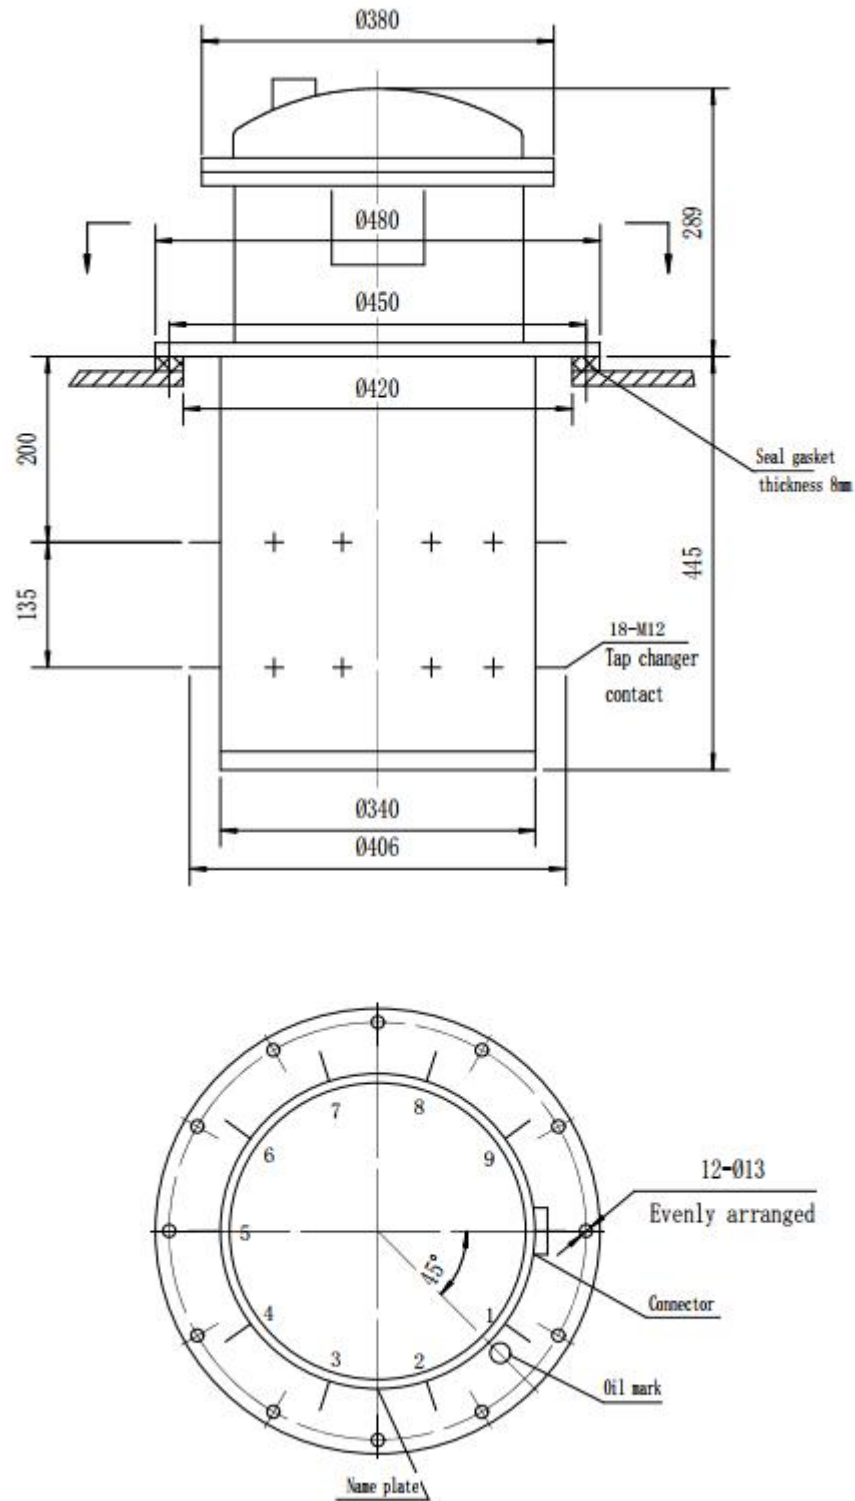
ZS I 100-10-9-X1 outline dimensions diagram
